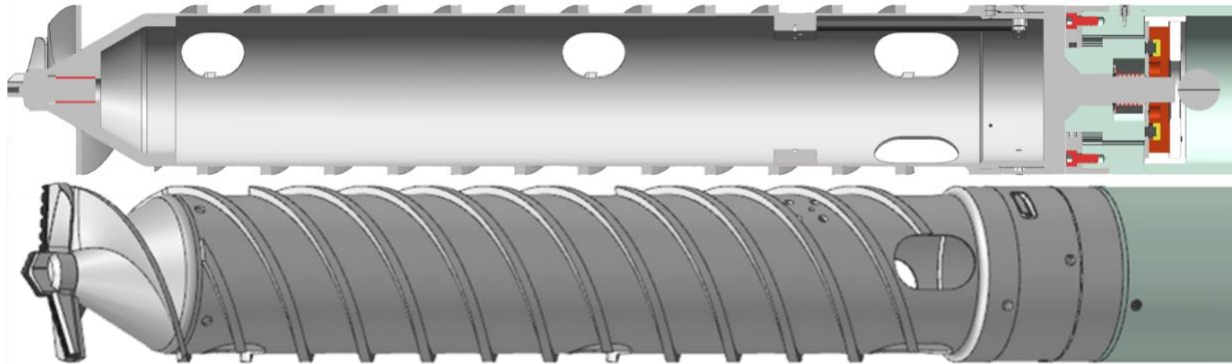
Bit design and interface to the rotating drill housing and striker impacts shown in cross section (top) and isometric view (bottom)
